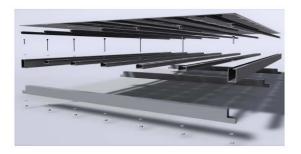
Assembly drawing of the laminate with seven aluminum profiles parallel to the long side of the module and three crosswise oriented bars.
